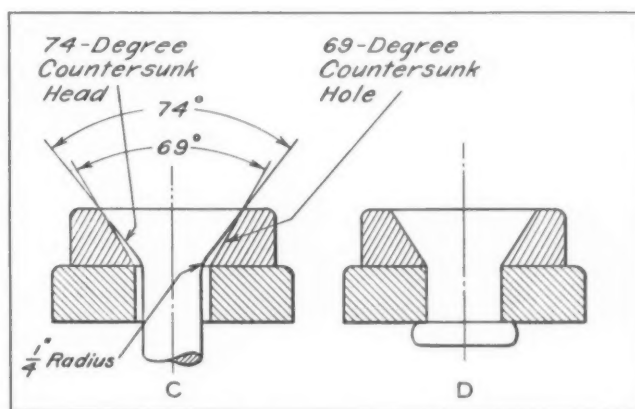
(C) Rivet Head and Countersunk Hole as Modified to Eliminate Failure. (D) Rivet Shown at C after Riveting Operation
